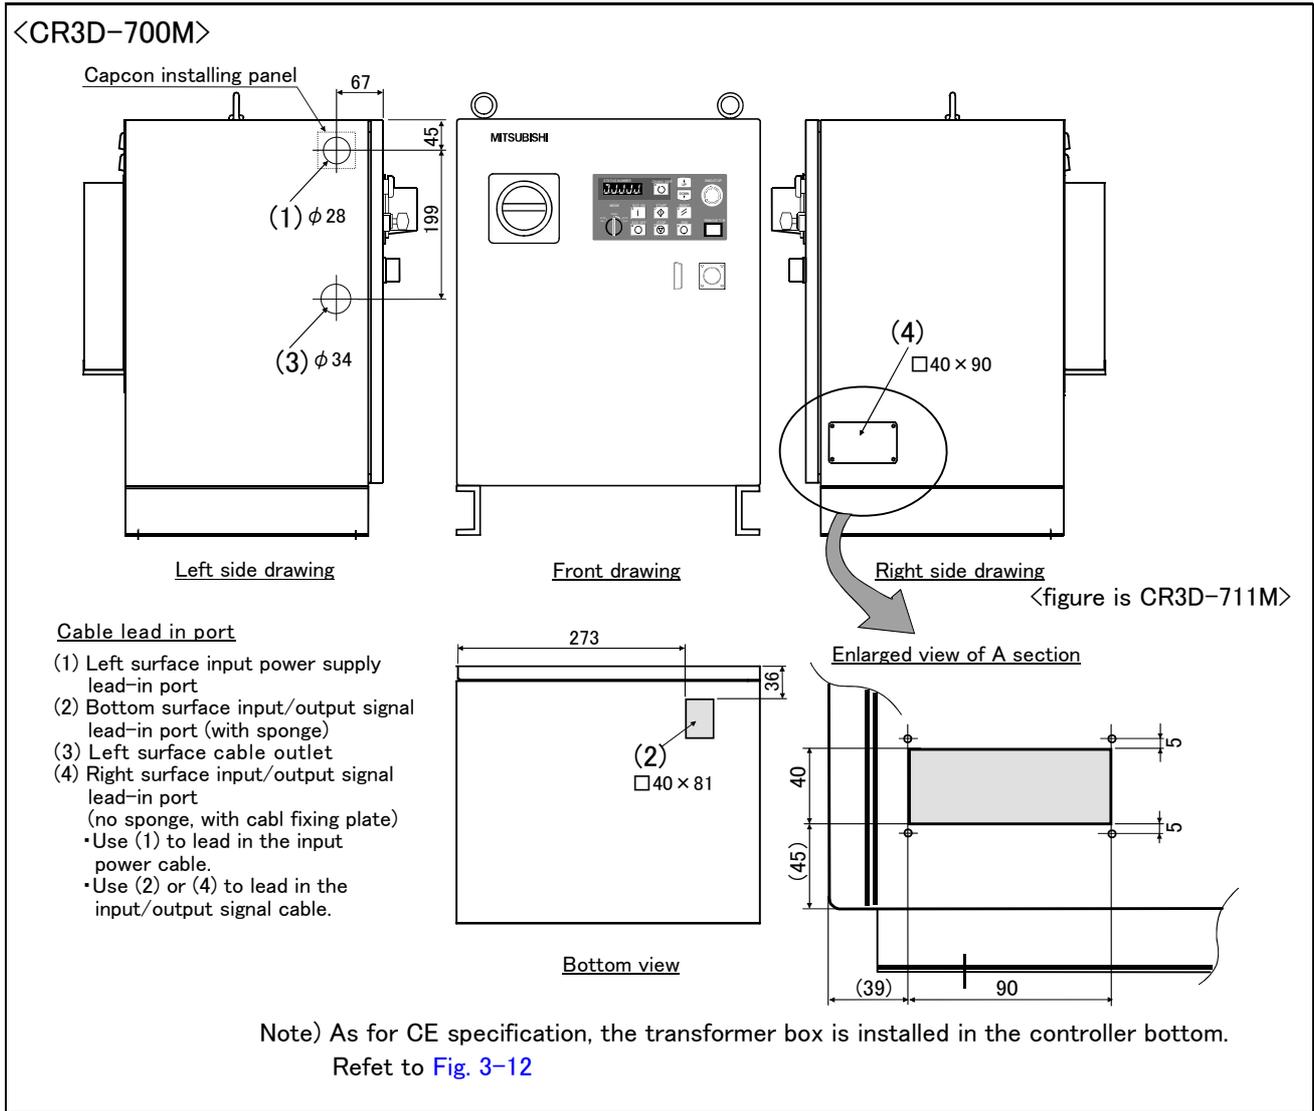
Cable lead-in and dimension of the controller (CR3D-700M Series)
